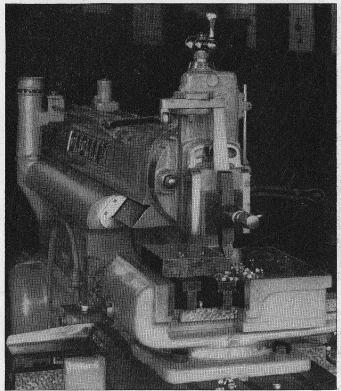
A piece being held in a shaper vise. (The Cincinnati Shaper Company)
